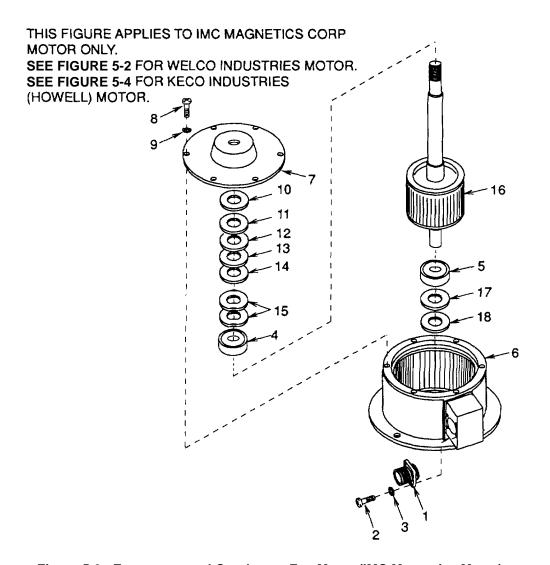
Evaporator and Condenser Fan Motor (IMC Magnetics Motor).
